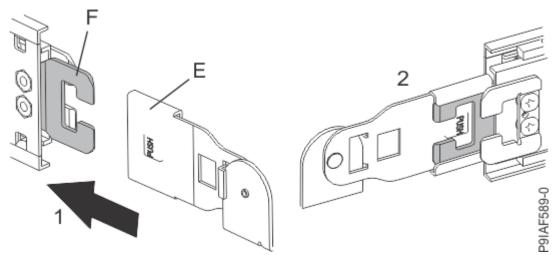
Attaching the CMA latch to the cable management arm to the outer cable management arm tab
